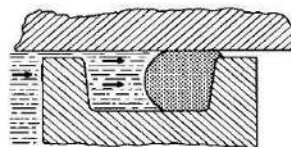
The groove in which an O-ring seal fits should be wider than the O-ring, but the depth should be 10% less than the O-ring diameter.
